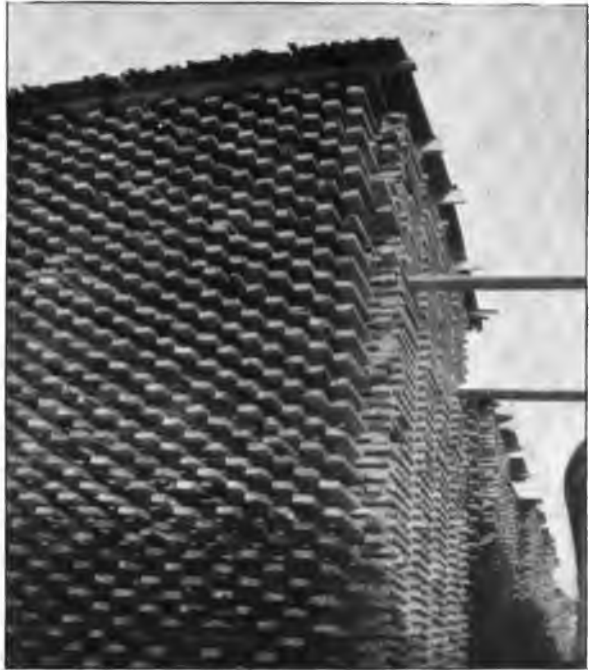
PILING LUMBER SO AS TO LEAVE ENDS 3 OR 4 INCHES LONG PROTRUDING FROM PILE.
